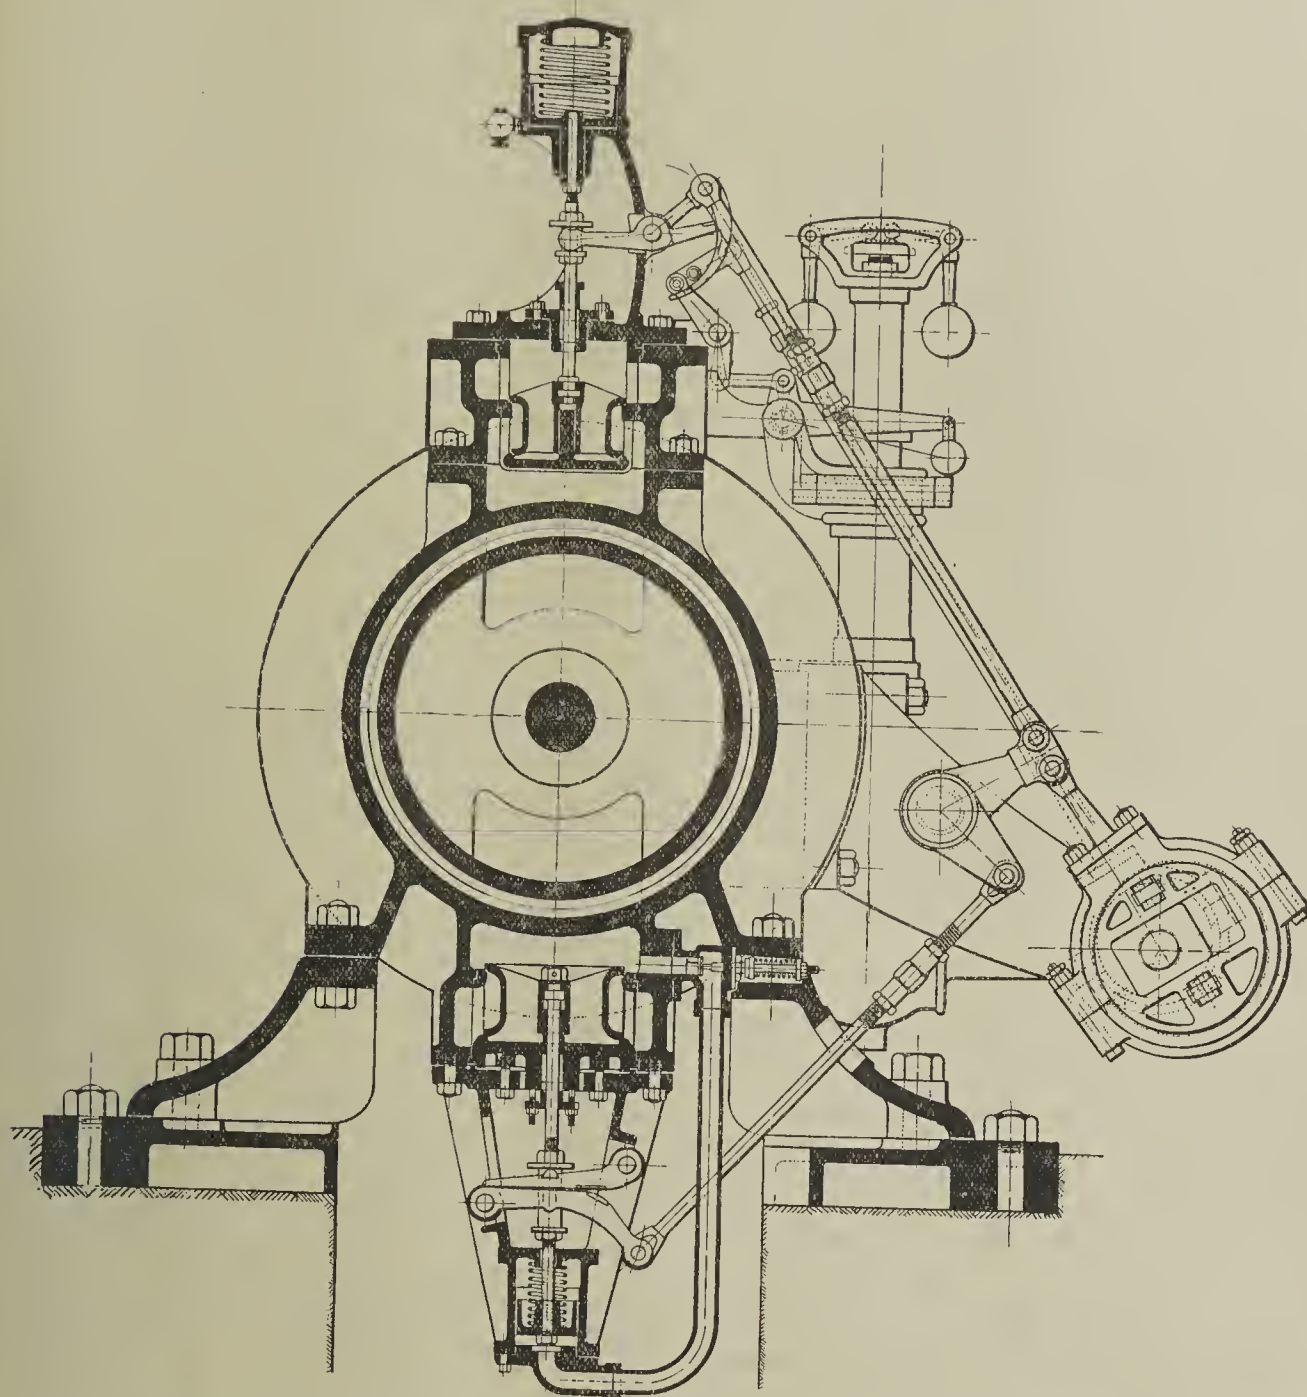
SECTION THROUGH HIGH-PRESSURE CYLINDER OF WINDING ENGINE, SHOWING VALVE GEAR.
